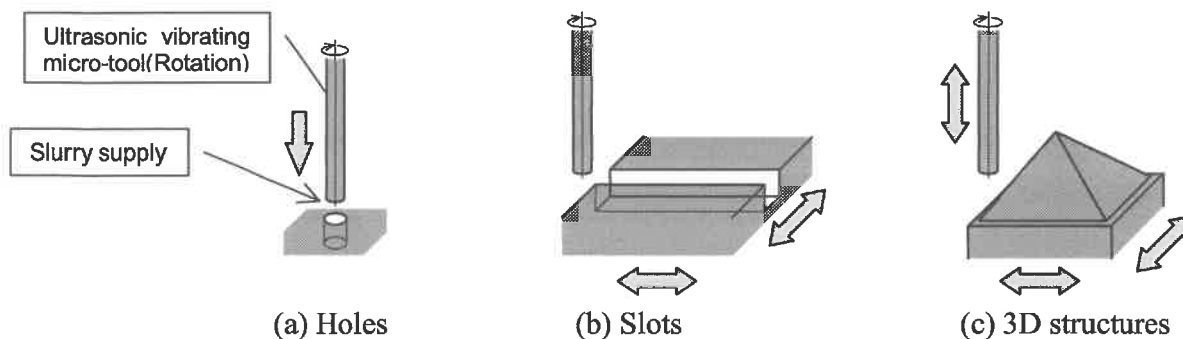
Micro-mechanical fabrication using ultrasonic machining
